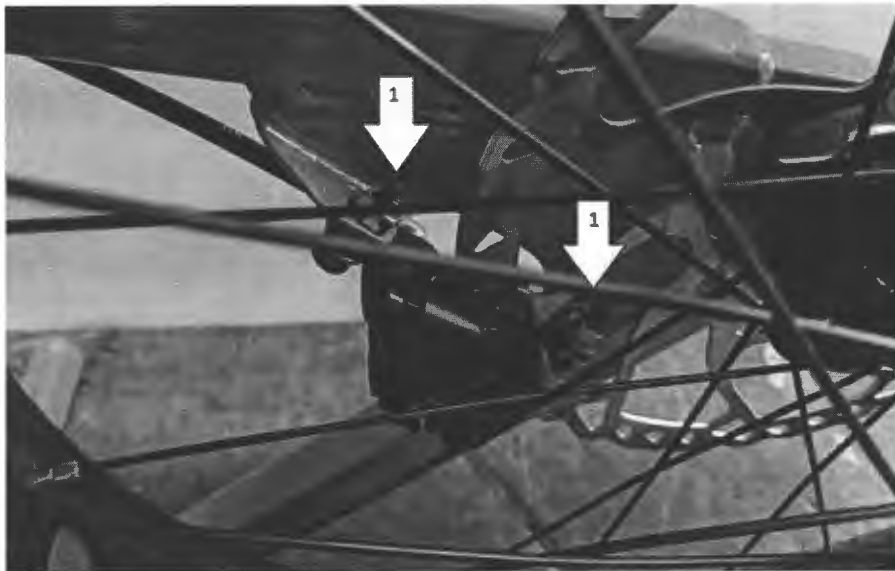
Attachment of the caliper to the caliper mount via the two screws and bolts. 1) Bolt locations.
